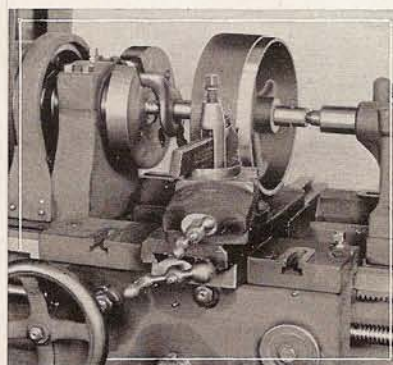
Machining a Driveshaft Brake Drum Mounted on a Mandrel.
